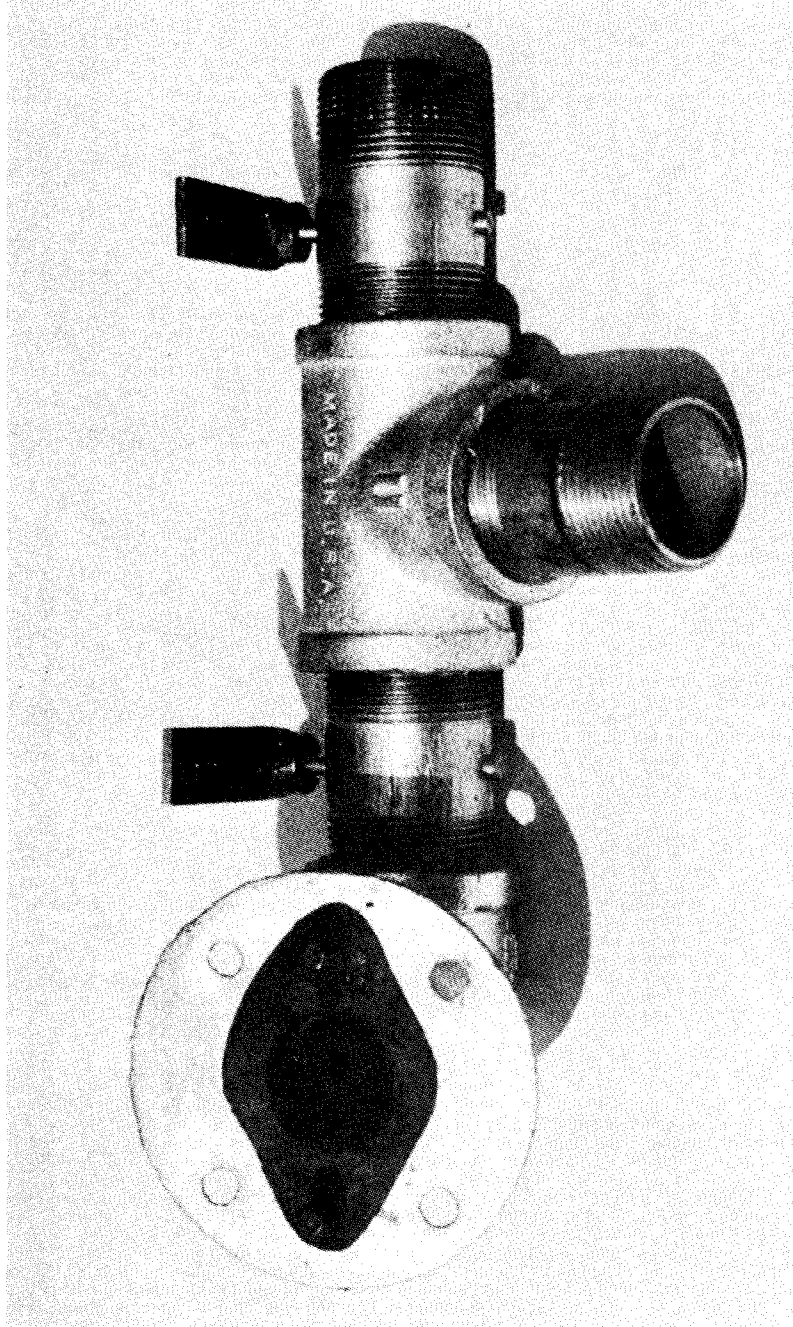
Assembled carburetion unit. Note the gasket on the closet flange.
